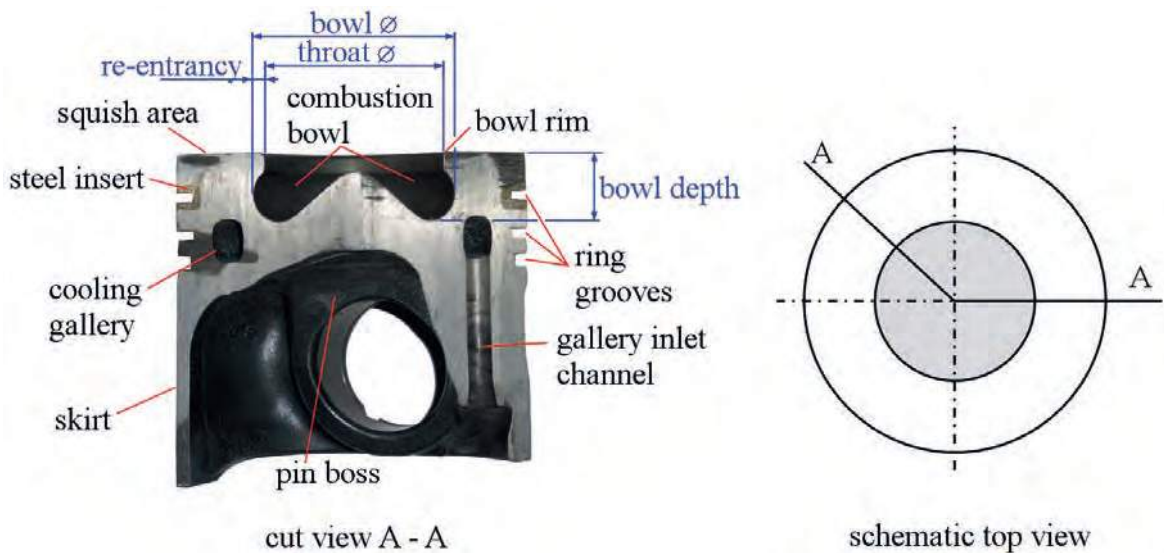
Cross-section cut view of diesel piston identifying important design features and view plane A - A
